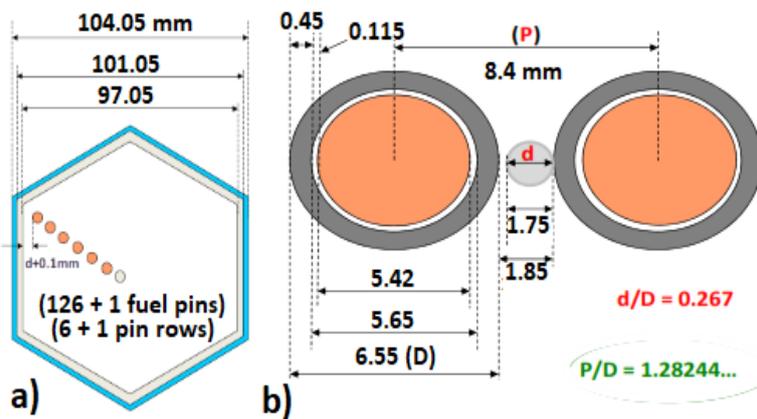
MYRRHA: a) fuel assembly radial view; b) fuel pin geometry [8].
